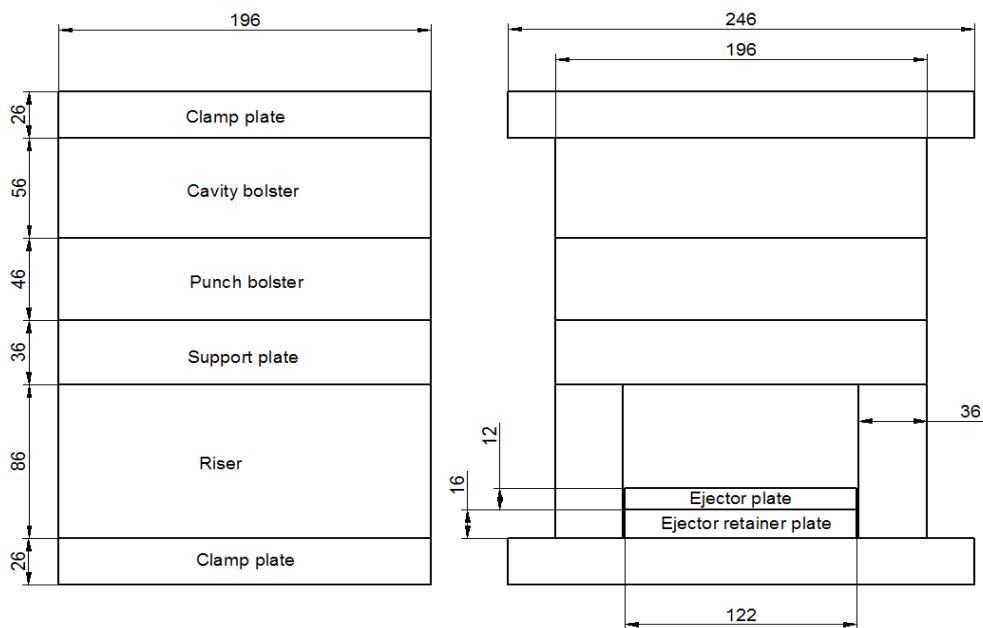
Dimensions and components of the steel bolster used during the IM trials.
